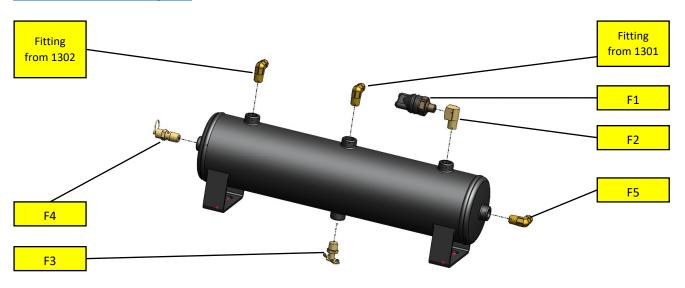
Air Tank Fittings Installed on Air Tank, Exploded View
